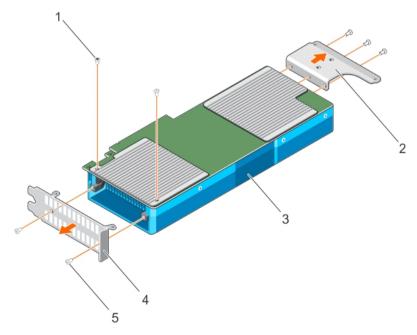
Removing the Nvidia GPU I/O brackets and the support brackets
